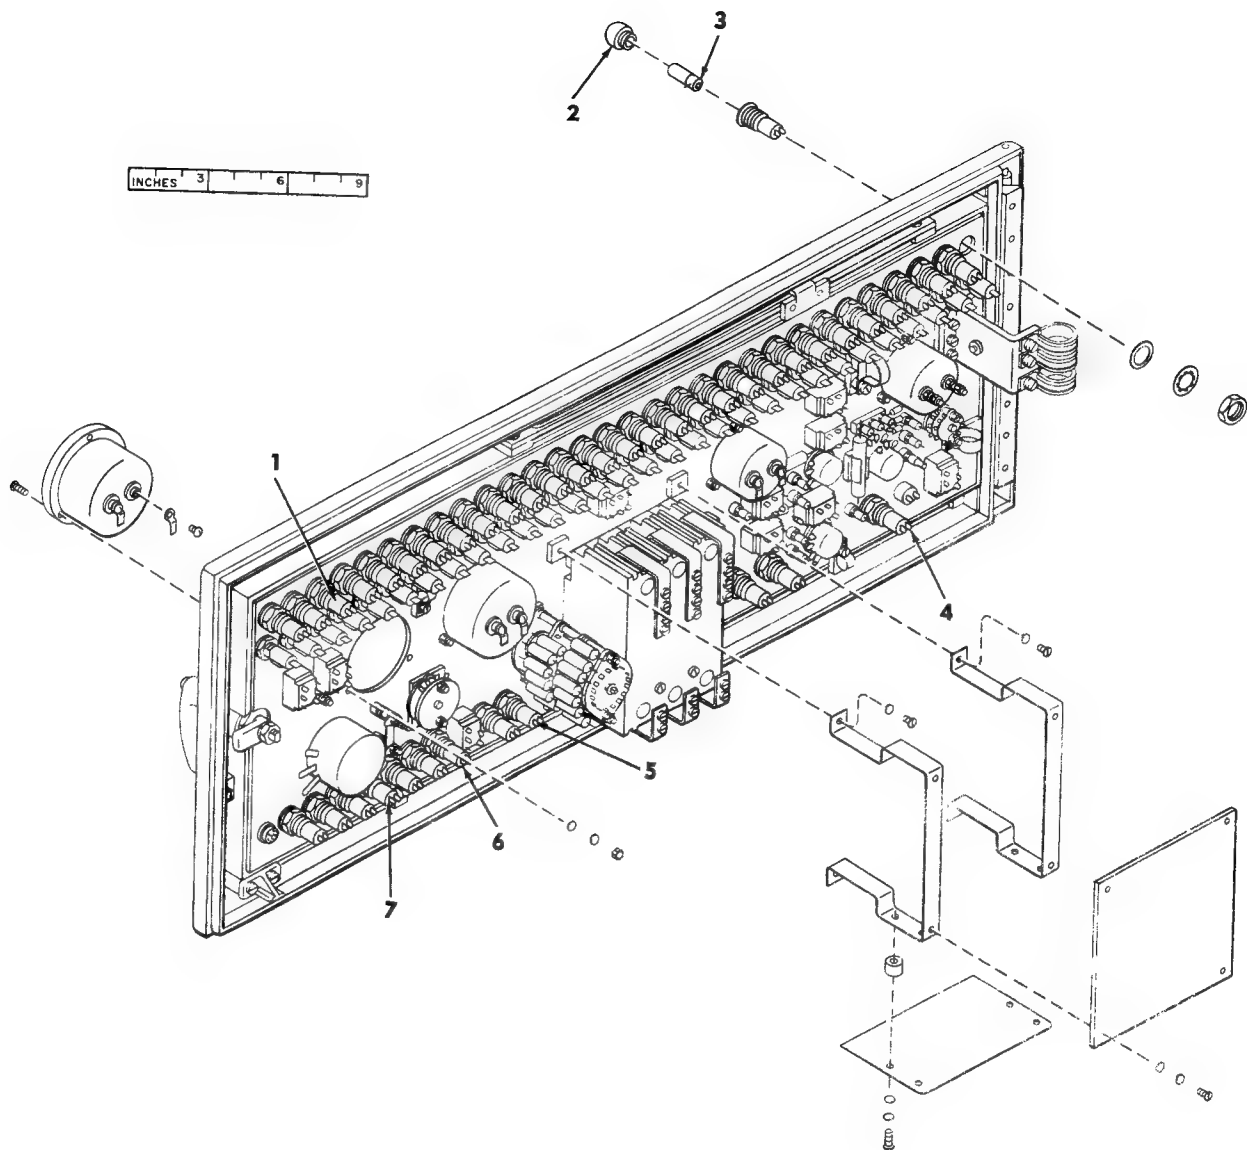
Control, receiver-transmitter (914131) - partial exploded view
